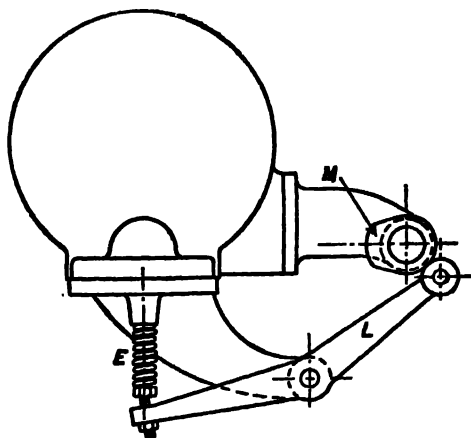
A.—Mechanism for raising valves in a gas-engine.
